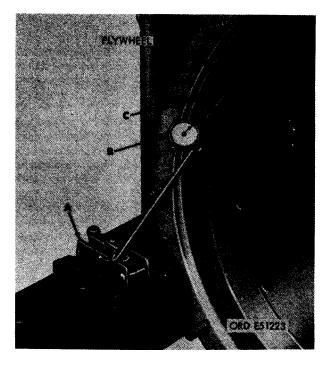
CHECKING FLYWHEEL RUNOUT USING DIAL INDICATOR.
